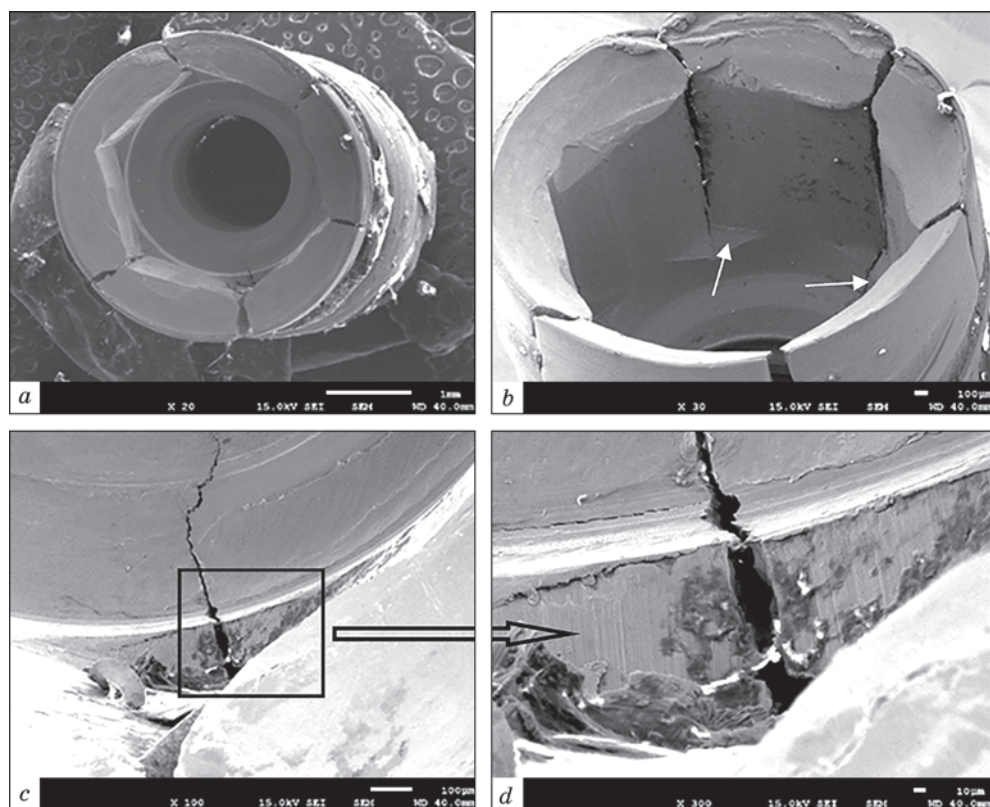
SEM fractography of the explanted NDIs c.p. Ti implant: a — the explanted implant top view ($\times 20$); b — the micrograph of the hexagonal inner connection (side view) with detail of longitudinal fracture cracks ($\times 30$); c and d — the micrographs with the crack propagation detail at the different magnifications ($\times 100$ and $\times 300$, respectively) [59]
